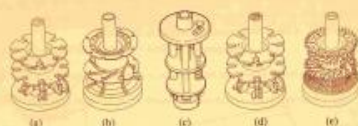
(a) Ink Pen Stocker (b) Auto Pencil Stocker (c) Automatic Lead Loader (d) Liquid Roller-Ball Pen Stocker (e) Pencil Stocker
